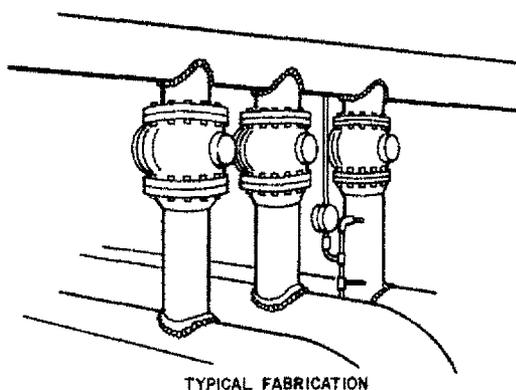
A typical welded-pipe fabrication.
